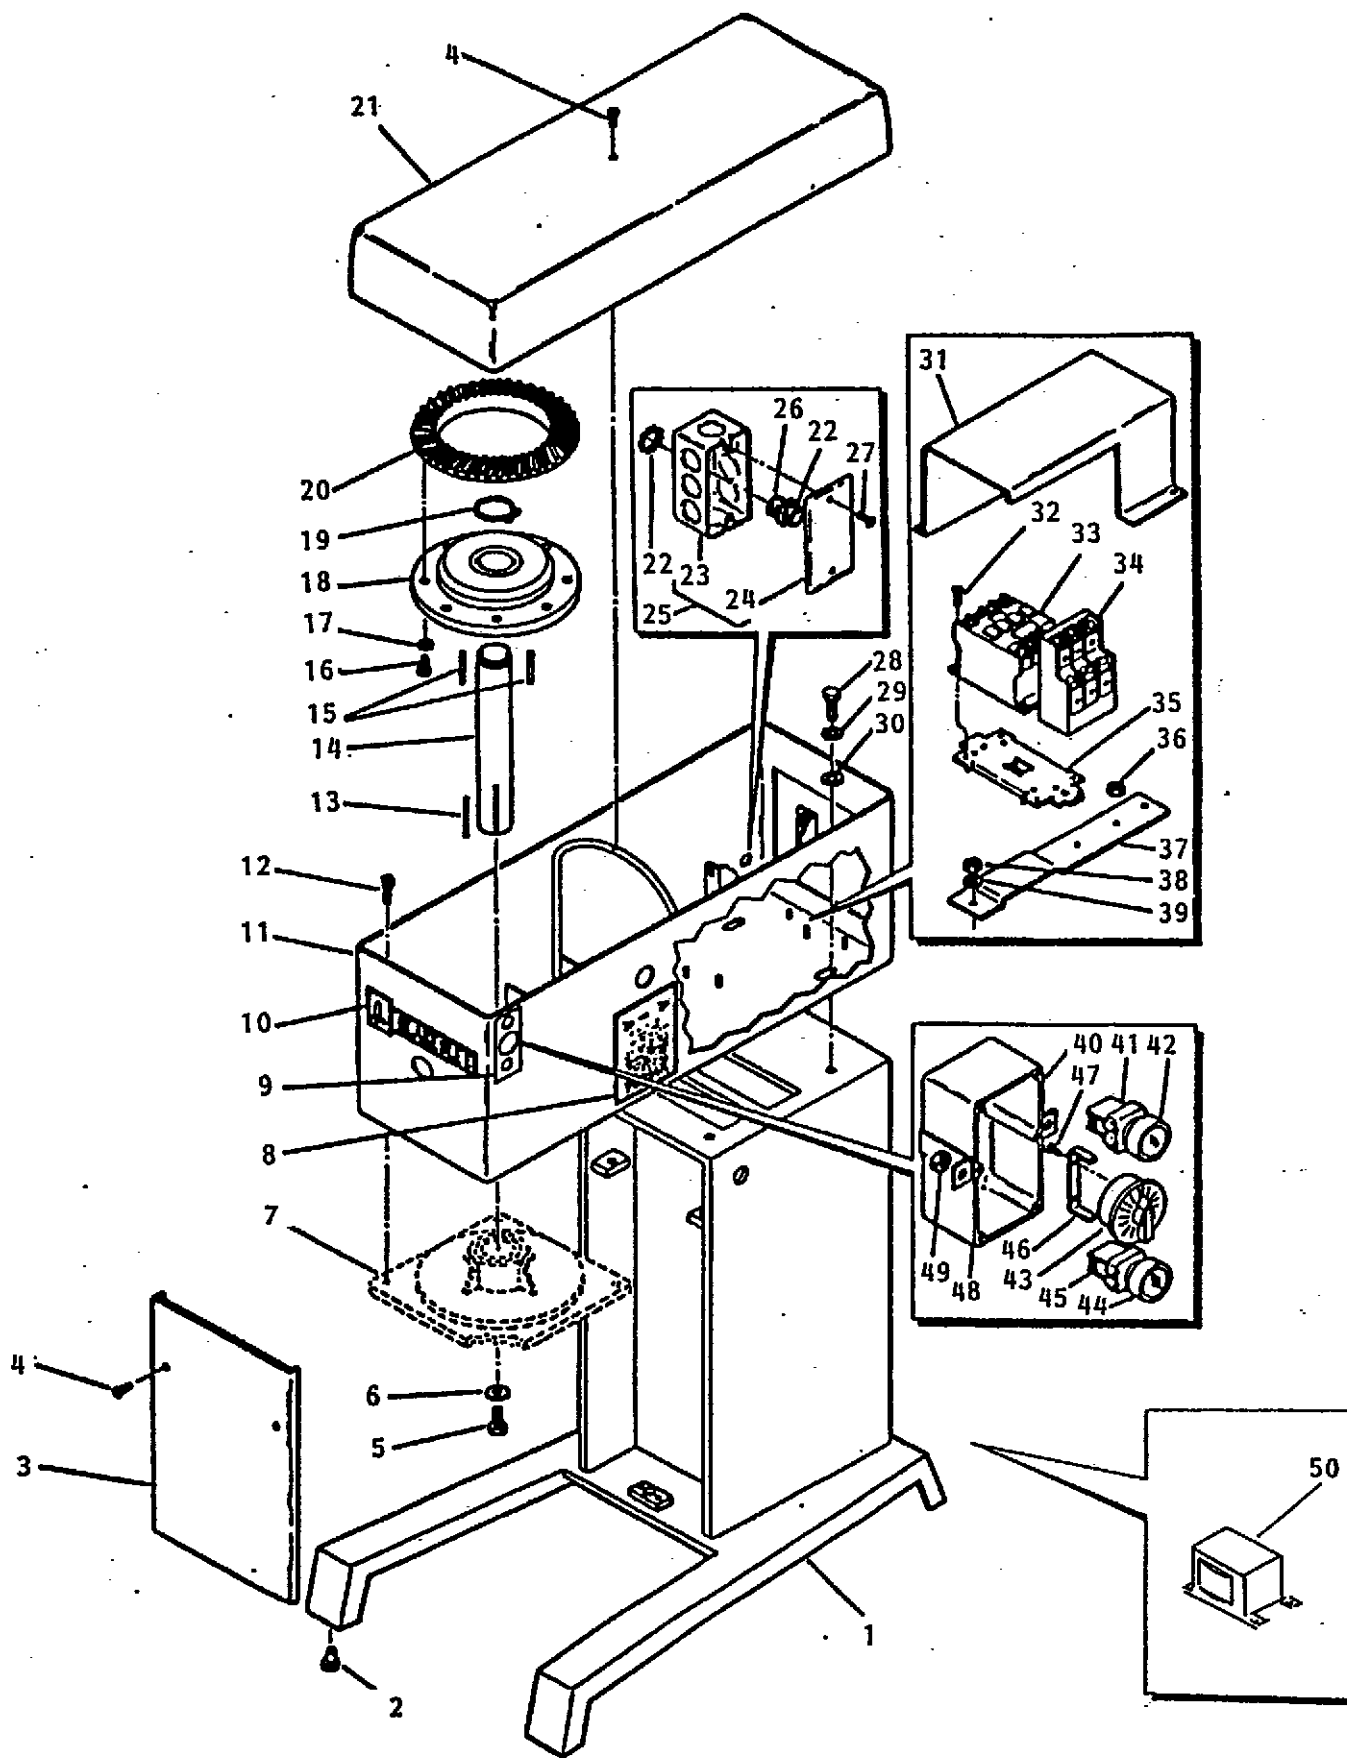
COLUMN WELDMENT, UPPER HOUSING, MAIN SHAFT AND ELECTRICAL COMPONENTS
